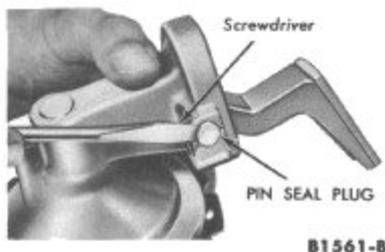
Rocker Arm Pin Seal Plug Removal or Installation
